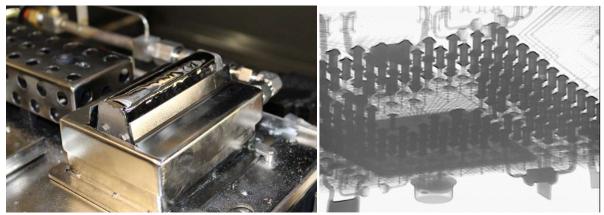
4" wide wave solder nozzle (left), and X-ray image of high mass PGA with complete PTH fill (right)
